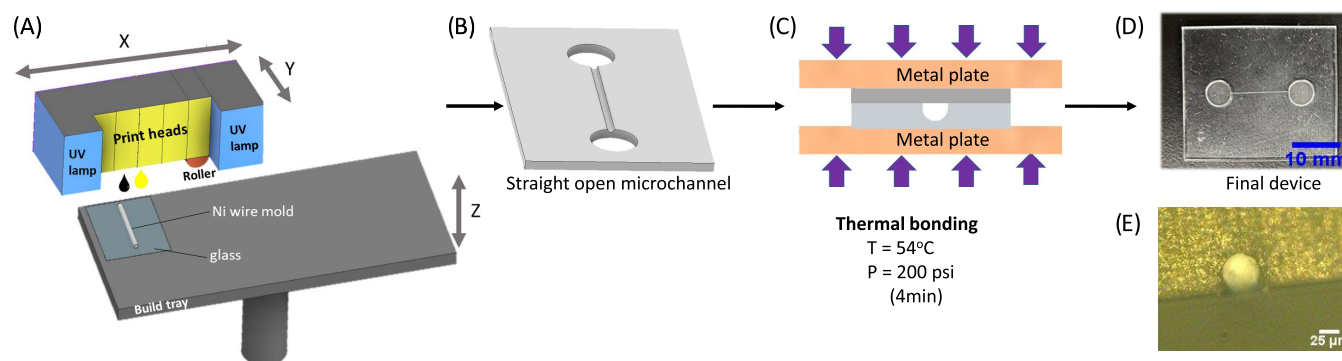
Fabrication of a straight microchannel device (25 or 50 μm diameter) with PolyJet 3D printing: (A) printing CAD design model direct on Ni wire of the desired dimension; (B) after removal of wire from the device; (C) thermal fusion bonding for sealing the channel; (D) photograph of the assembled device; and (E) bright-field micrograph showing the cross-sectional area of the sealed channel.
